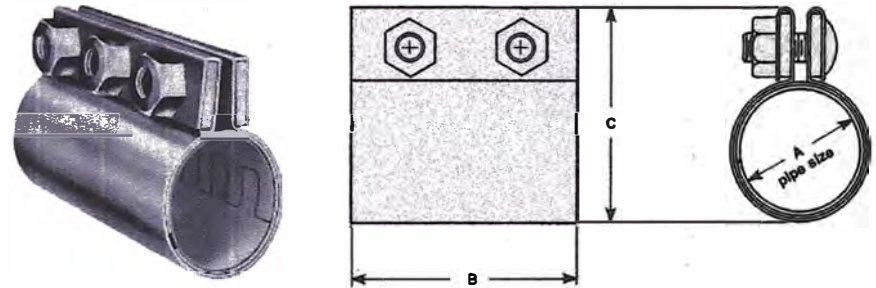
Pipe connector for convenient joining of low pressure air pipes
